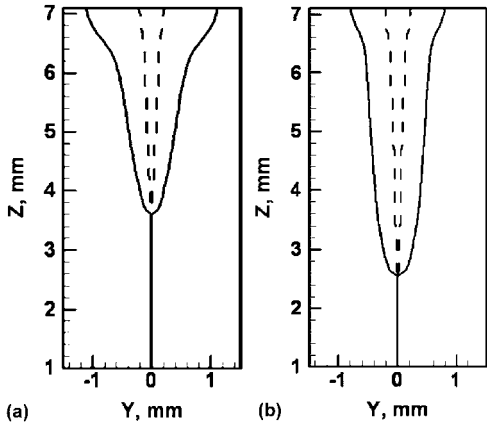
Computed fusion-zone cross sections for Ti-6Al-4V welds at 1000 W and 17 mm/s (0.67 in./s). (a) Laser beam welding. (b) Electron beam welding. Adapted from Ref 93
